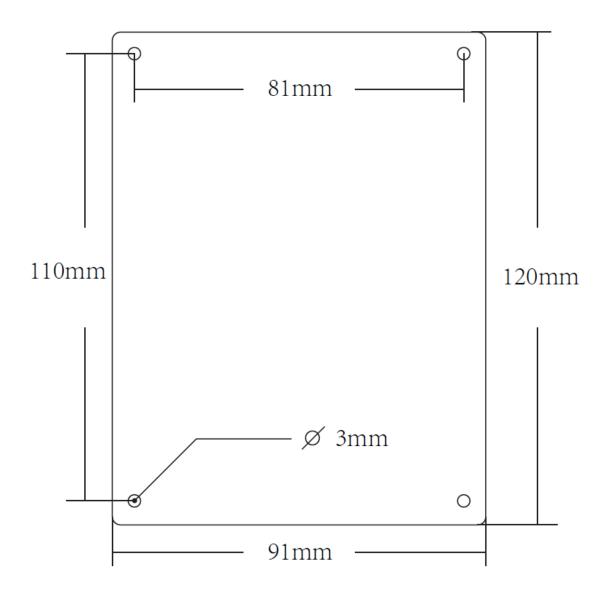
The Mechanical Dimensions of SLAMWARE BREAKOUT
